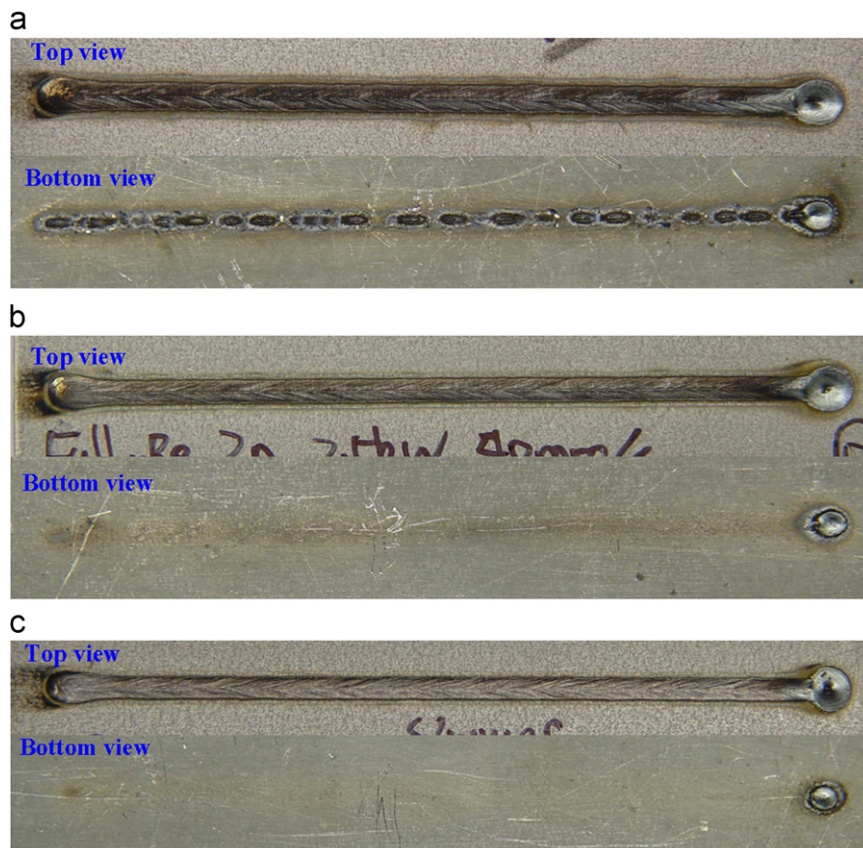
The top and bottom views of DP980 weld obtained by laser power of 2.5 kW and fully removed zinc coating at the faying interface. (a) $v=30$ mm/s. (b) $v=40$ mm/s. (c) $v=50$ mm/s.
